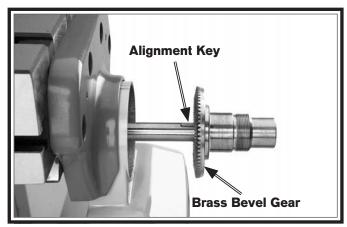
Example of power feed brass gear and leadscrew alignment key.
